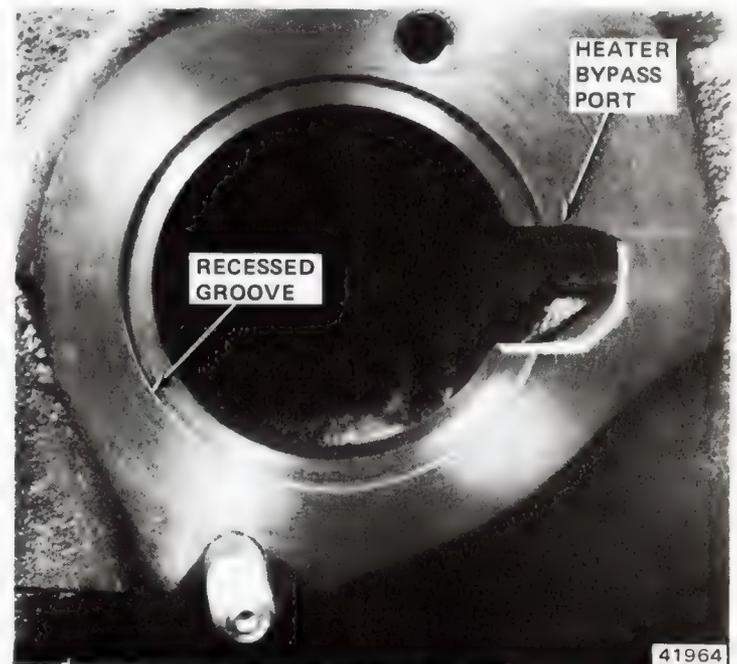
C-22 Thermostat Recess—Six-Cylinder
